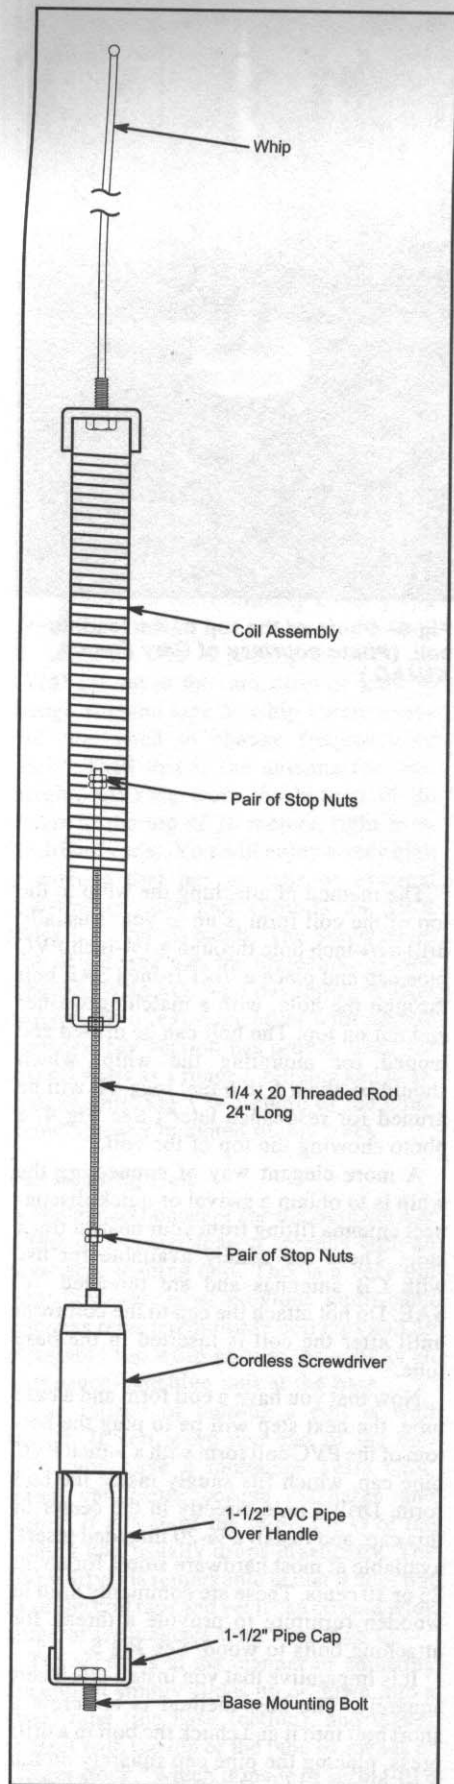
The coil assembly and cordless screwdriver drive assembly.
